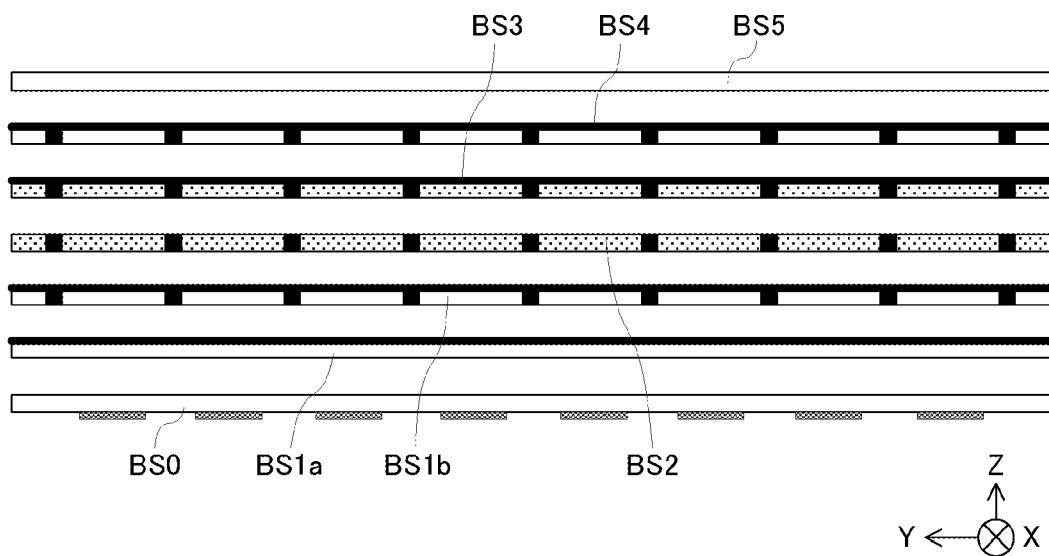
B CUT MULTILAYER BODY INTO PIECES
